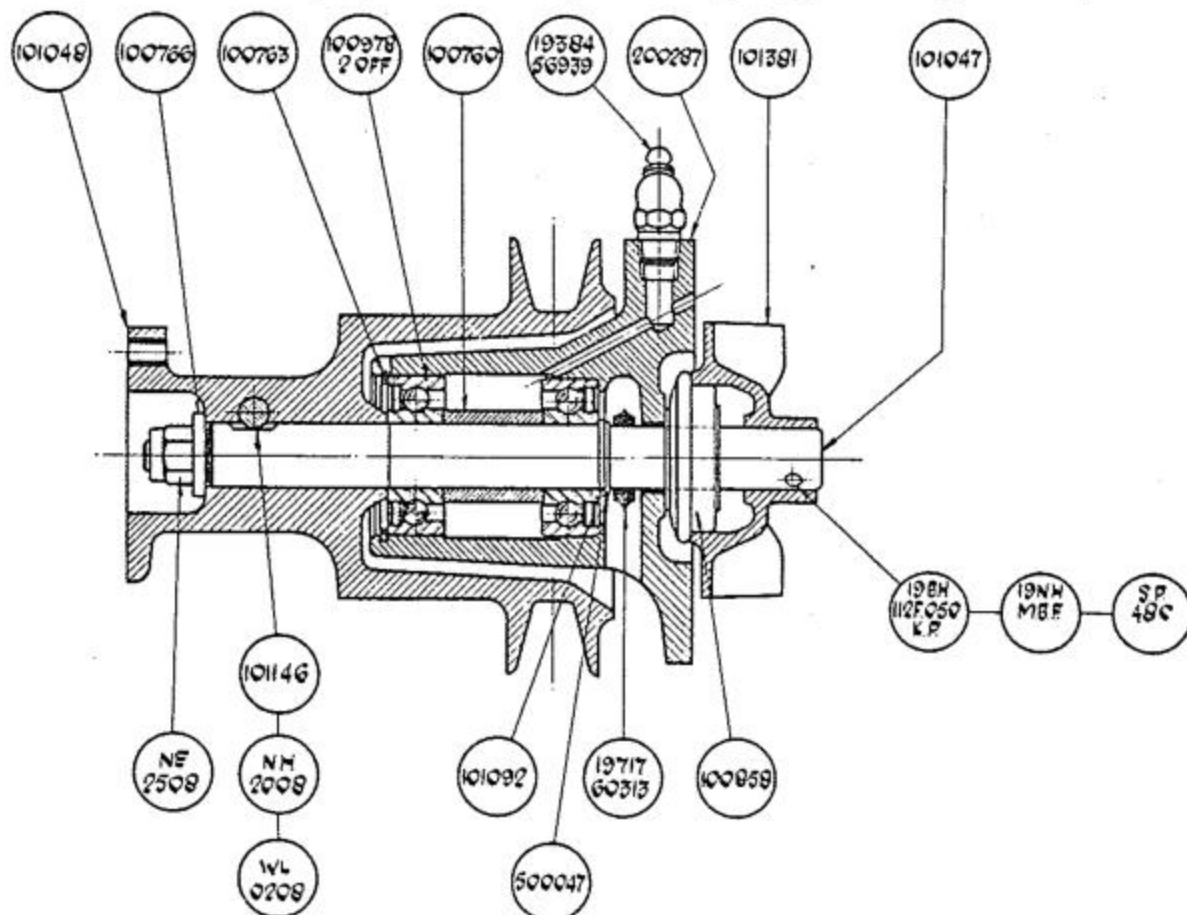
Fan and Water Pump Bearing Housing Assembly. Detail No. 101049—The assembly, as shown, was introduced at Eng. No. V.46611E, but used from V.42140E and V.46610E with the Seal and Impeller fitted to Water Pump 58910.
